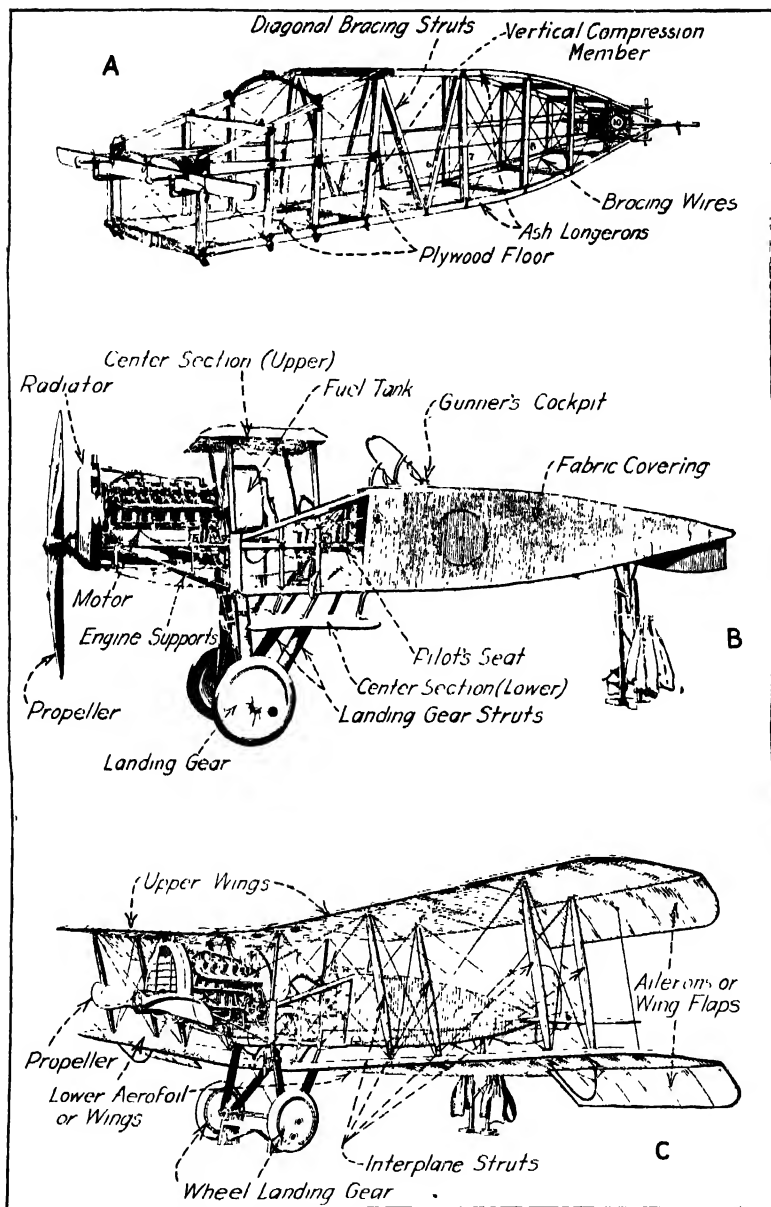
Diagrams Showing Steps in Assembling Biplane Using Wood and Wire Truss Type Fuselage. A—Fuselage Being Lined Up. B—Fuselage with Covering, Center Section, Landing Gear and Power Plant Installed. C—Airplane Practically Complete after Biplane Wing Cellules are Attached to Center Section.
